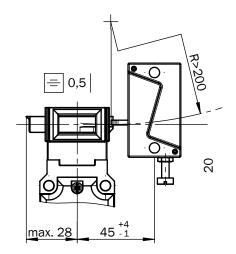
Dimensional drawing of TR110-XABT angled actuator (mm) Figure 48: Min. door radii for TR110-XAS straight actuator (mm)
